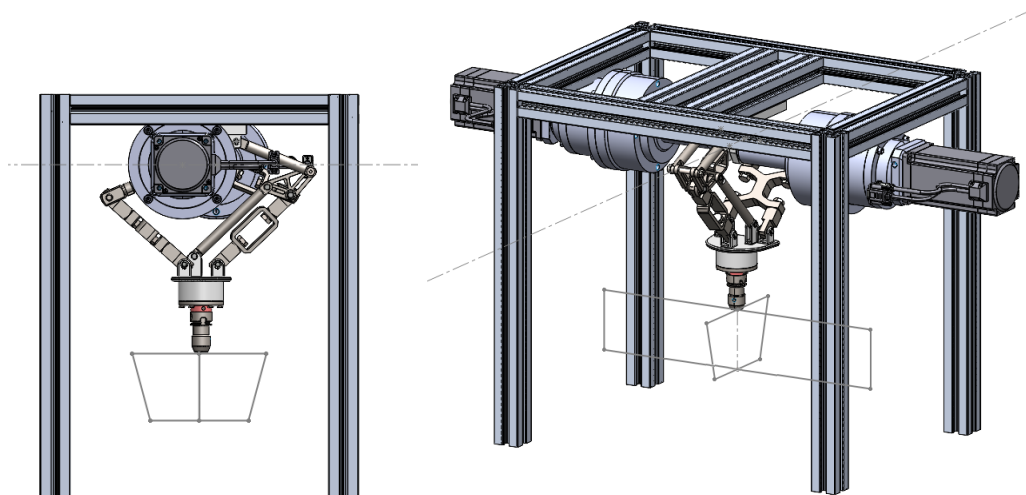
Hypothesis 4 motor–reducer configuration: horizontal motor with a linear reducer.
